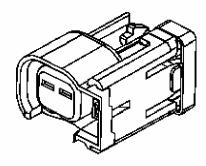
Horn Assembly Connector End View Courtesy of GENERAL MOTORS CORP.
